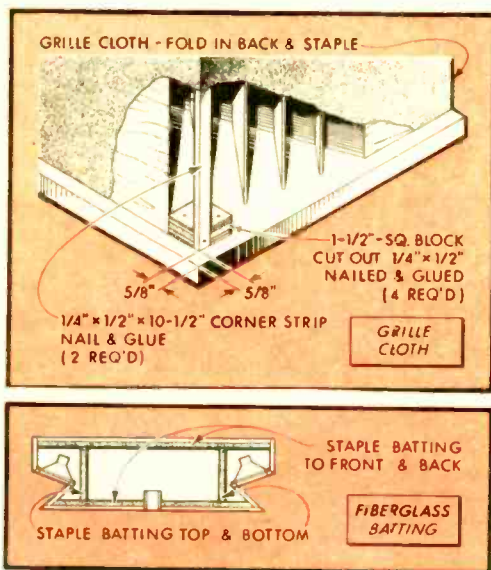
Top sketch shows construction of corner supports around which grille cloth is wrapped. Sketch below shows location of fiberglass batting.
